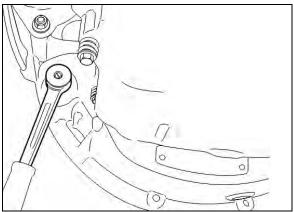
VOLVO ENGINE CRANKING POSITION
